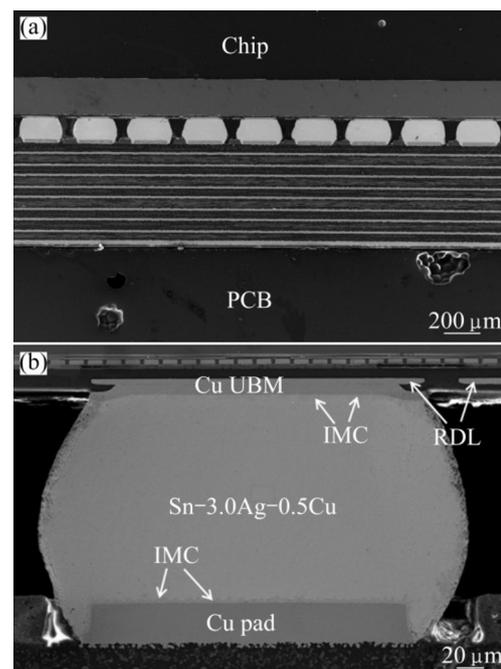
Cross-sectional microstructures of as-soldered sample: (a) WLCSP; (b) Solder joint
